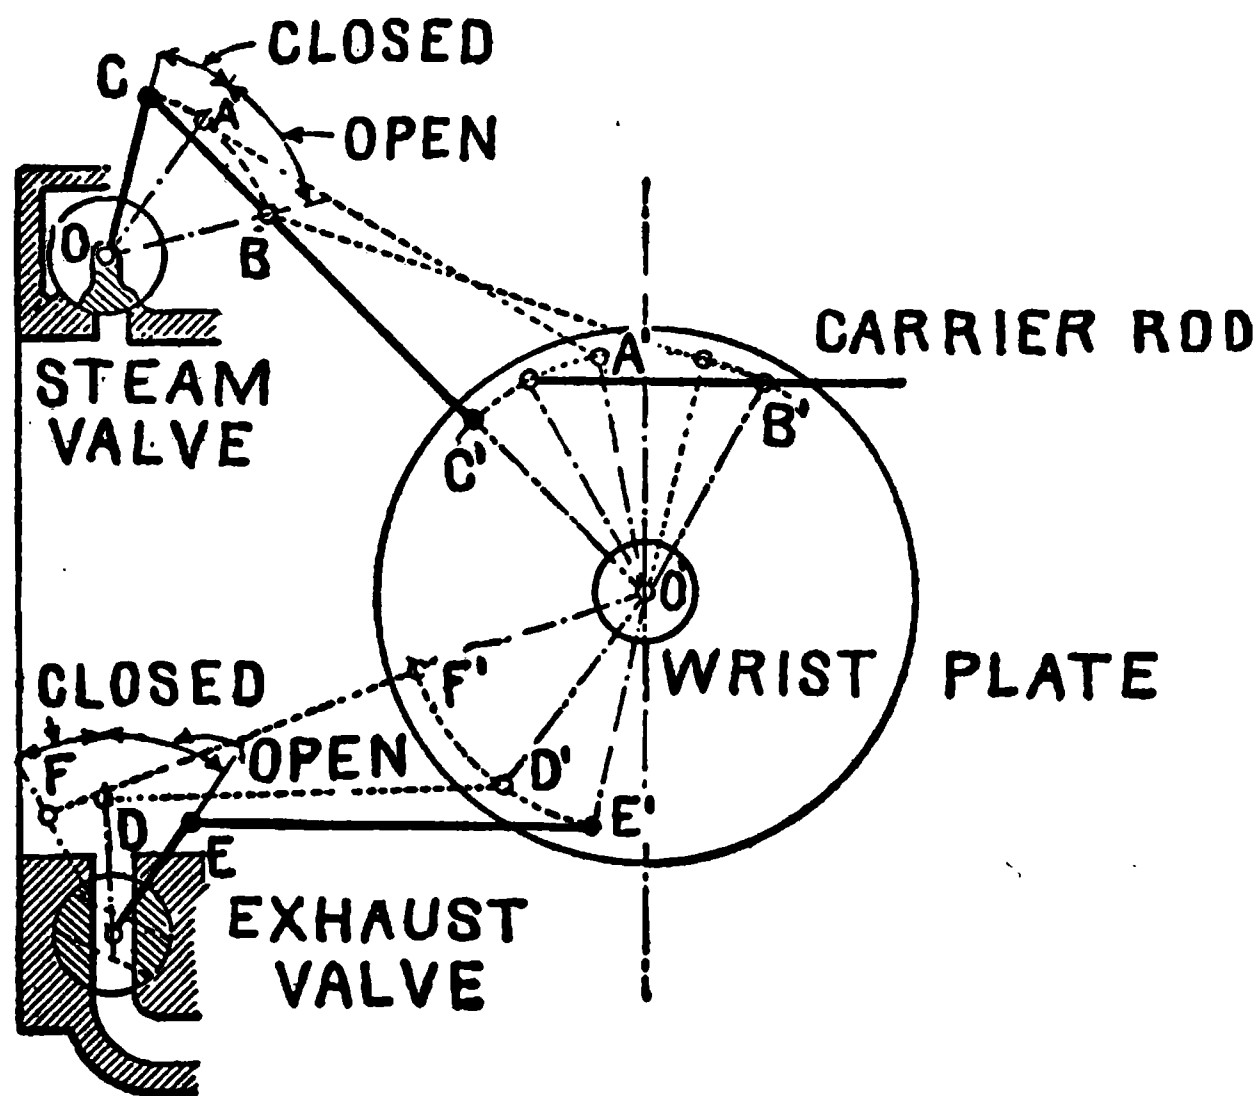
Illustrating the peculiar action of the wrist plate and valve rods which produces a rapid opening and closing of the ports, with a slower movement during the closed periods. This reduces wire-drawing, thus utilizing the steam to better advantage.
